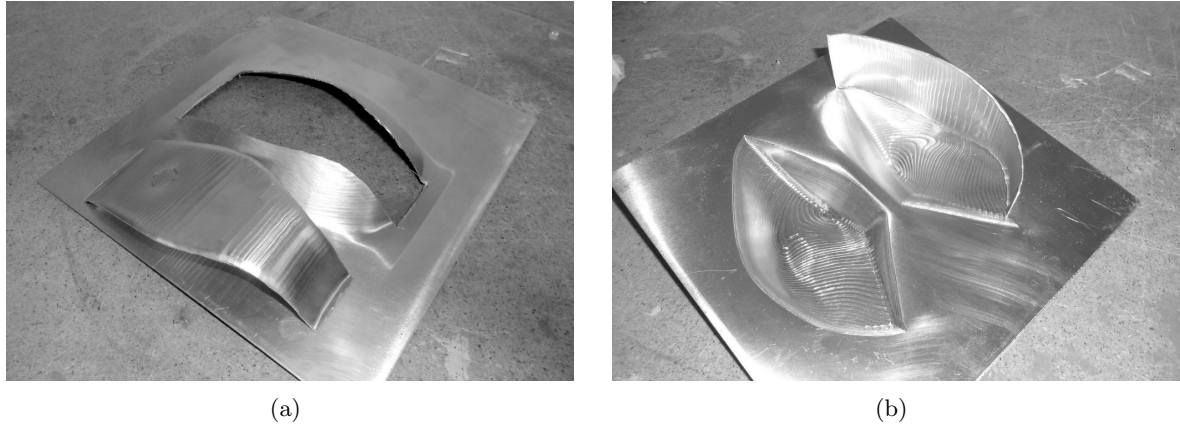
Scaled bike tank prototype cut and assembly operations: (a) top part cut, (b) relative position between parts
